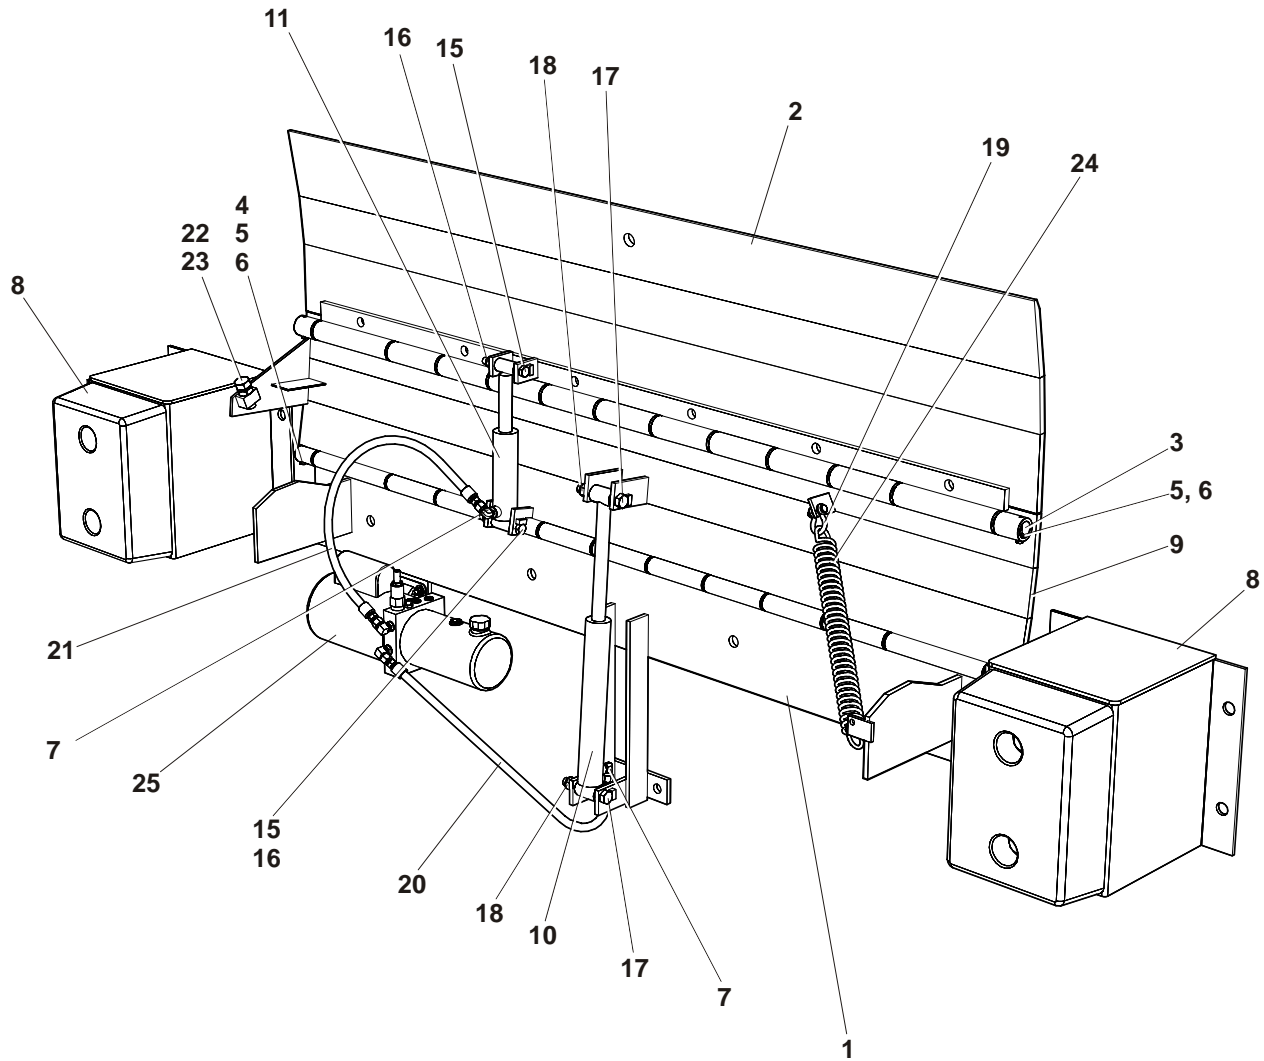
General Assembly - 25,000 lb. Capacity - 72" Wide
